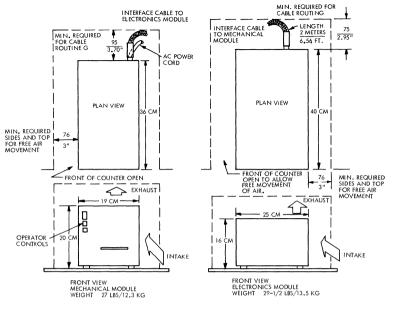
Cabling, Dimensions, Weight, Mounting Clearances, and Air Flow (Sheet 8 of 17)
